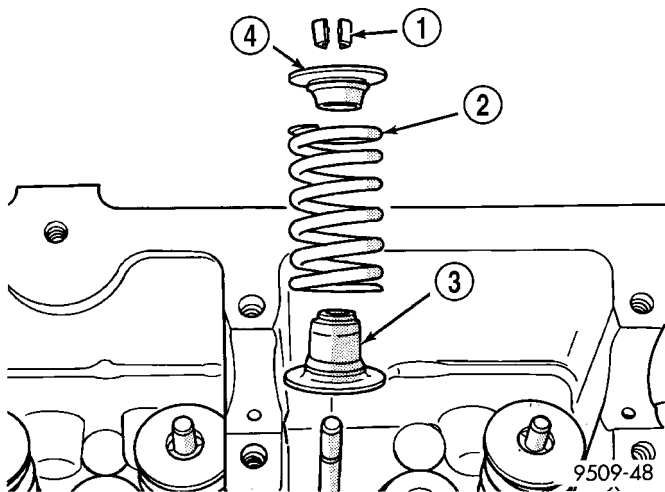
Valve Stem Seal/Valve Spring Seat - Typical
